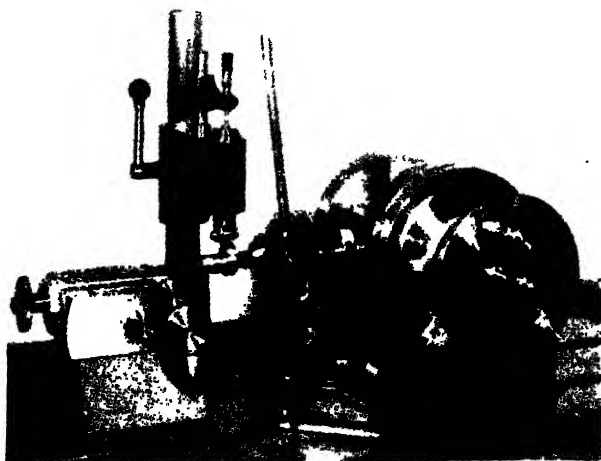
The Index head being used to inspect a camshaft. (*The Cincinnati Milling Machine Company*)
